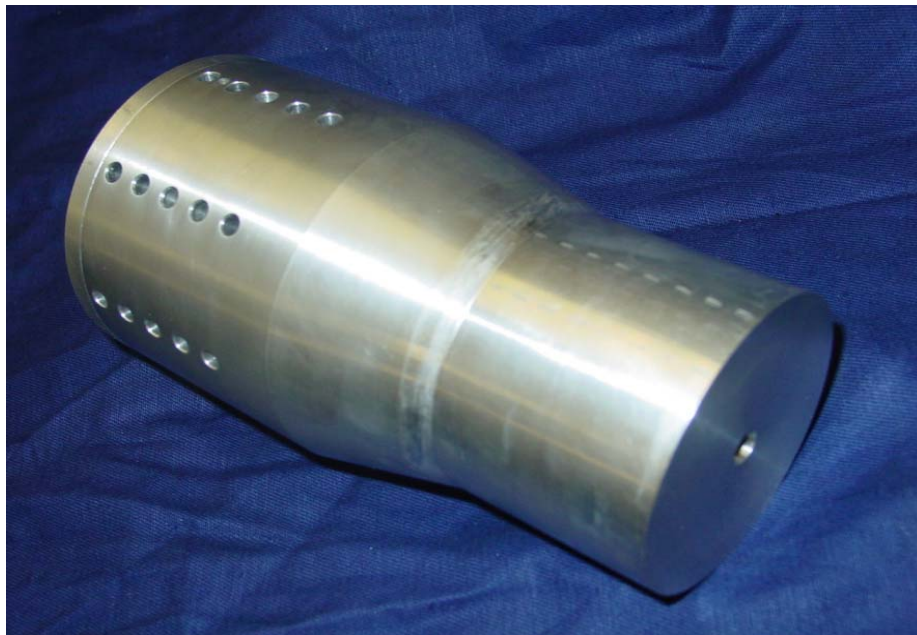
Specially designed fixture for elastomer cutting tests.
